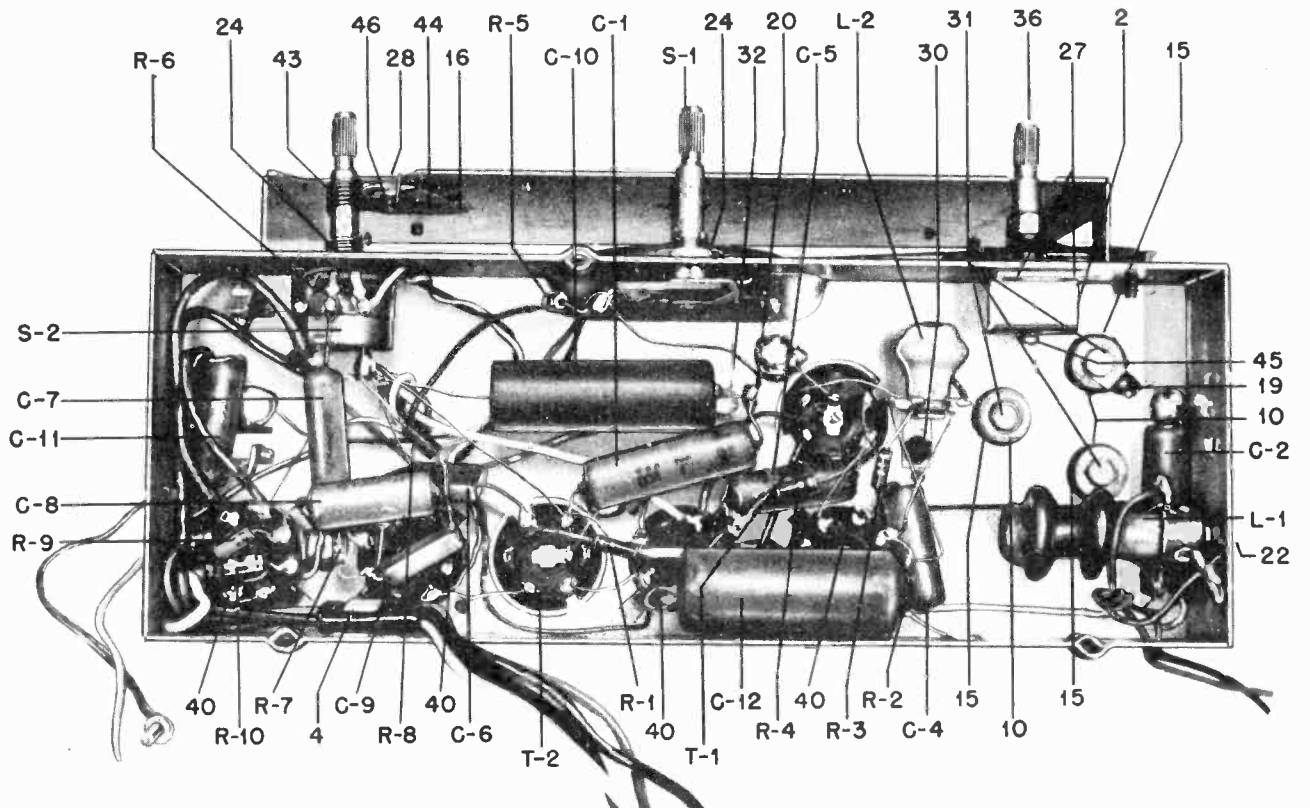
PARTS LOCATION - CHASSIS BOTTOM
